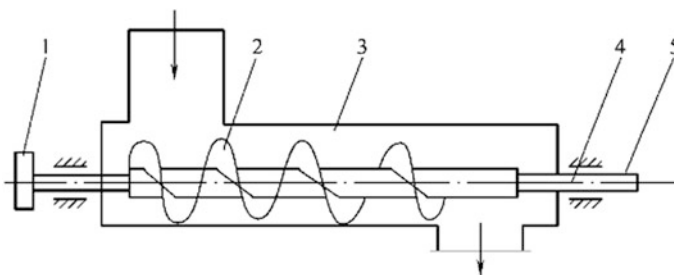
The schematic diagram of screw conveyor. Note 1, belt pulley; 2, helix; 3, shell; 4, bearing; 5, axle
